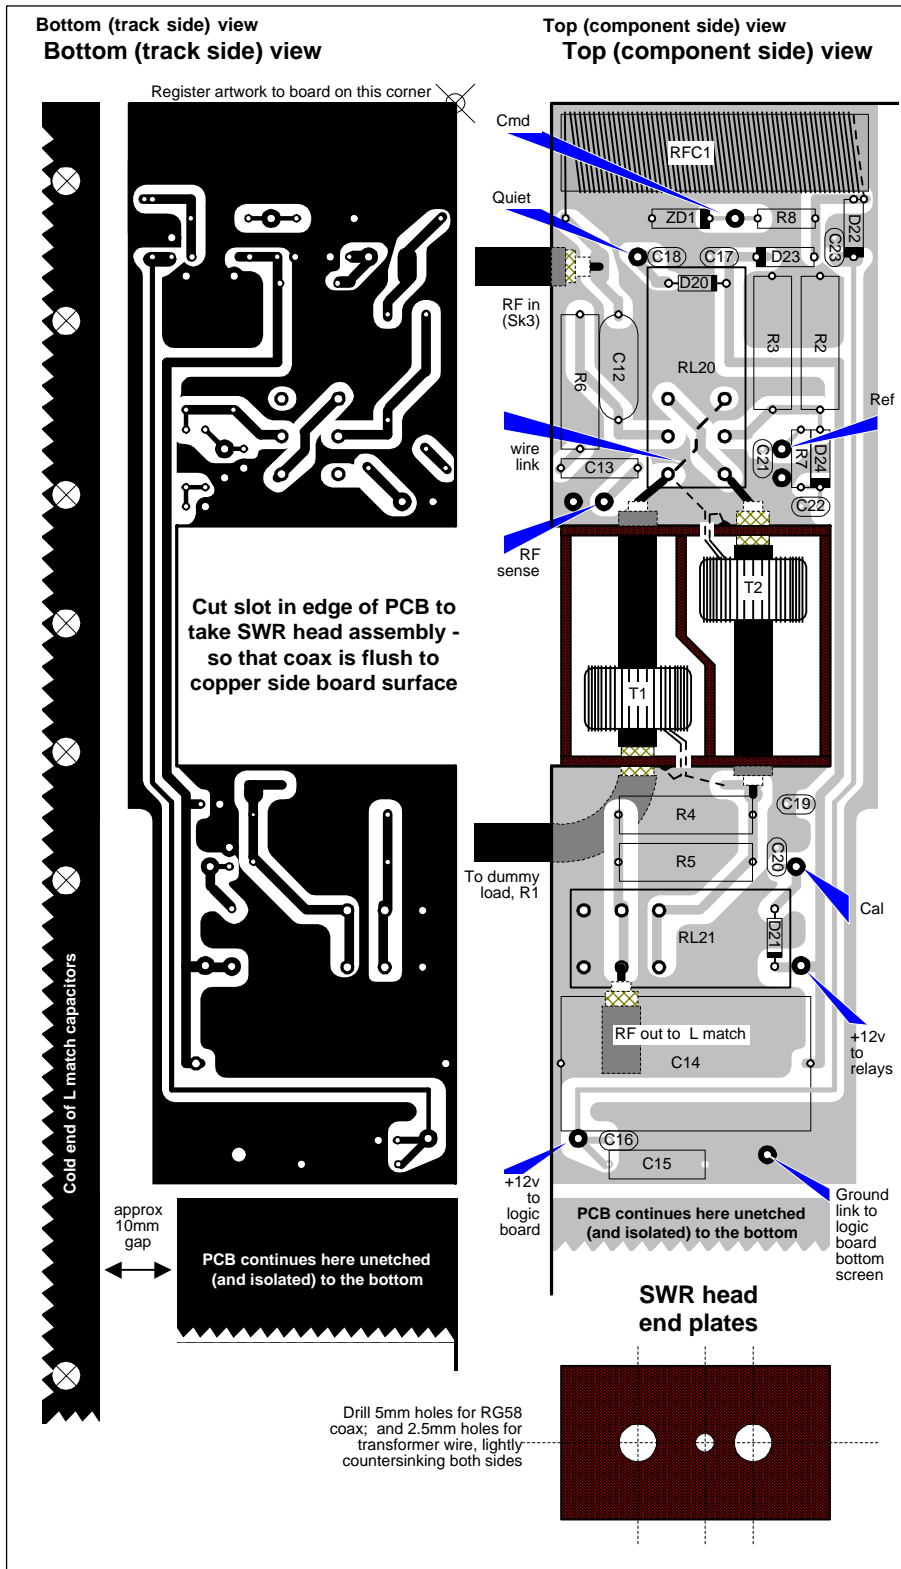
Sensor section of RF deck PCB. Note that all the coax cables are fitted on the underside (track side) of the board. Bond RFC1 to board after fitting board to casing.
